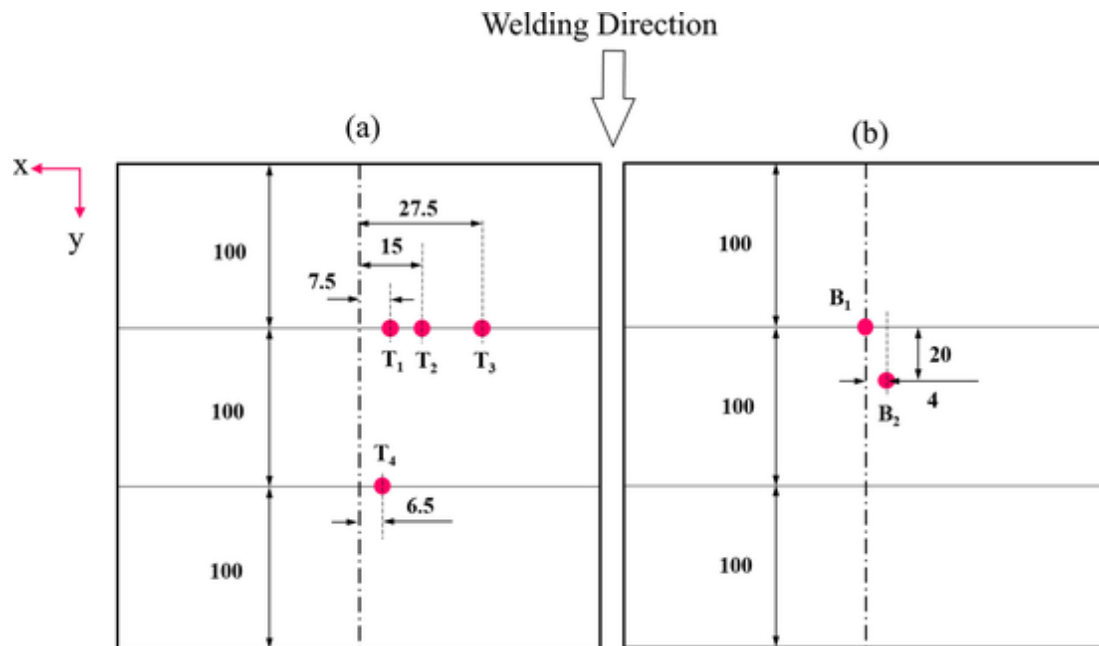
Positions of thermocouples on top (a) and bottom (b) surfaces. (Units in mm).
